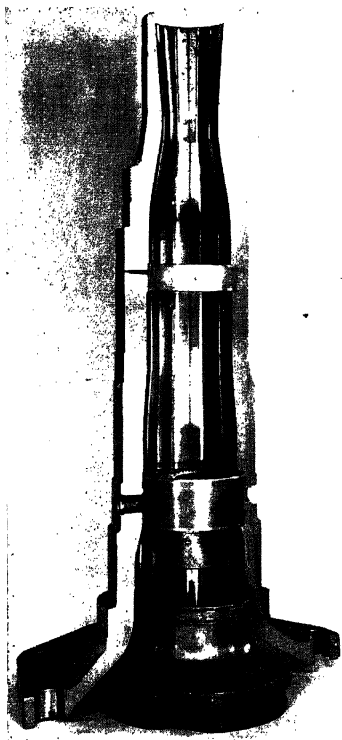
Section of Bramo Fafnir 323P airscrew shaft.
